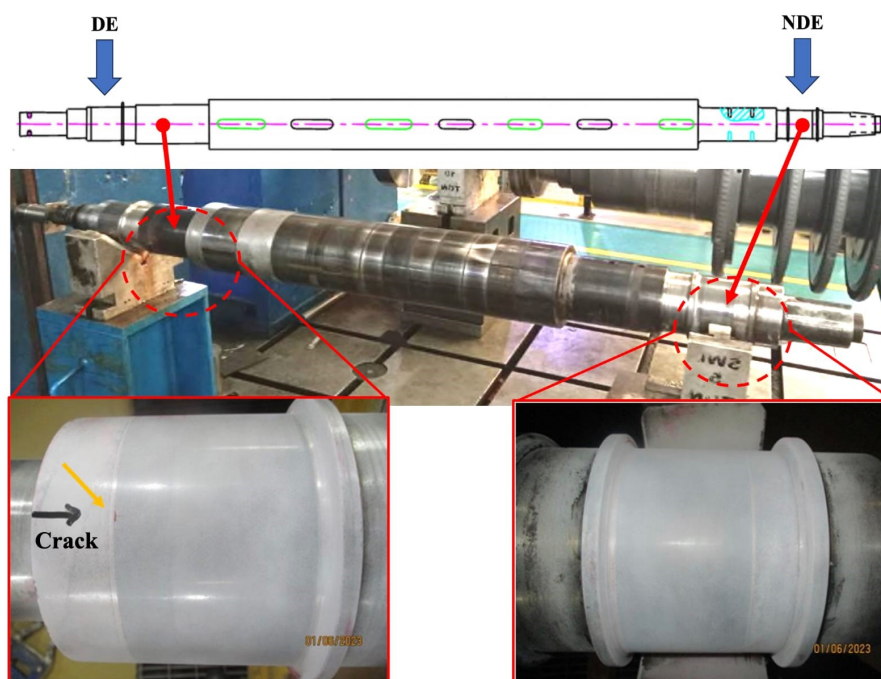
Nondestructive testing on the DE and NDE shaft sections
